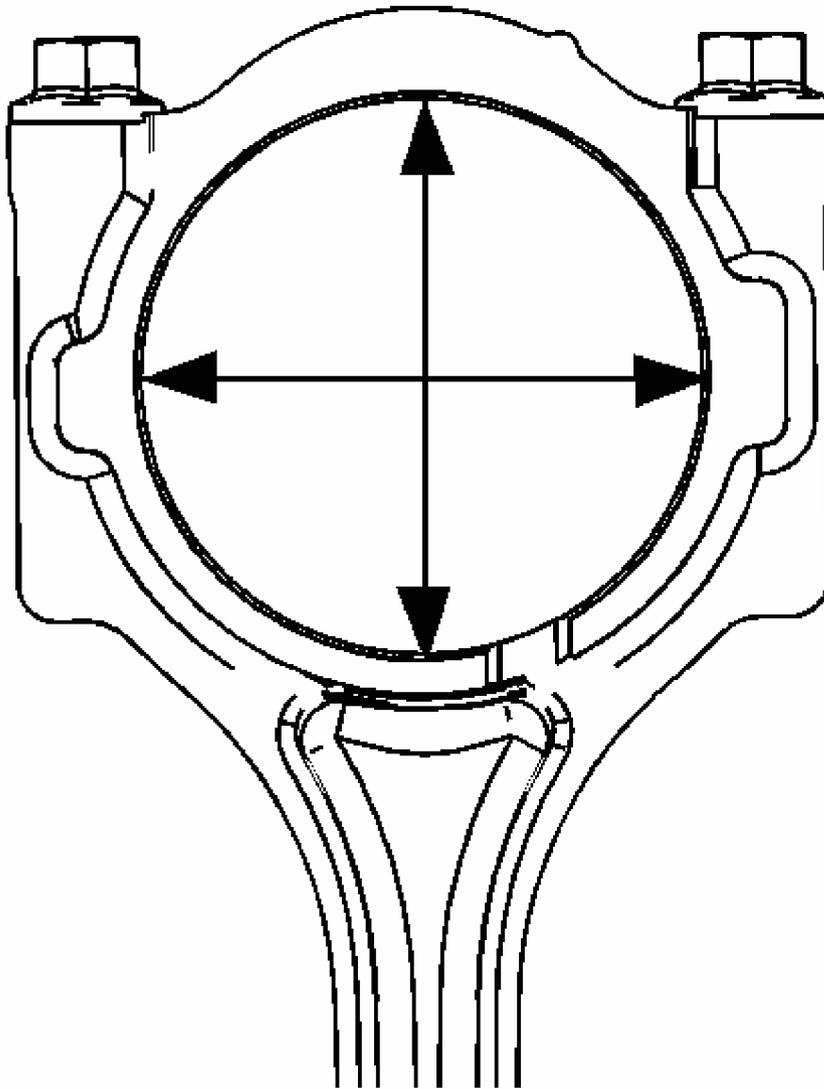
Measuring Connecting Rod Crankshaft Bearing Bore
